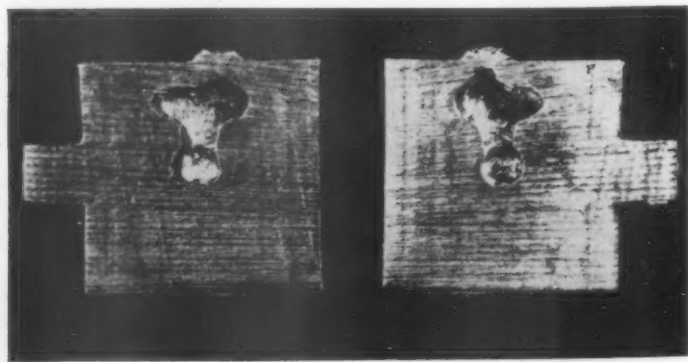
STEEL CASTING SECTION SHOWING SHRINKAGE CAVITY. (Courtesy, American Steel Foundries.)
